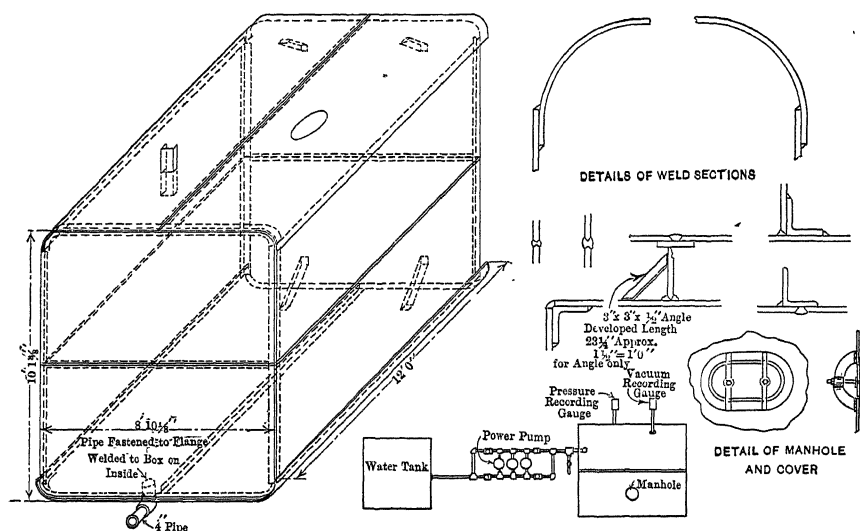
OUTLINE AND DIMENSIONS OF ARC-WELDED STEEL BOX.
